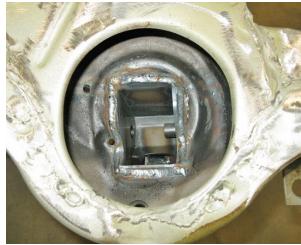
Weld the Bottom of the Coilover Pocket to the Spring Perch
